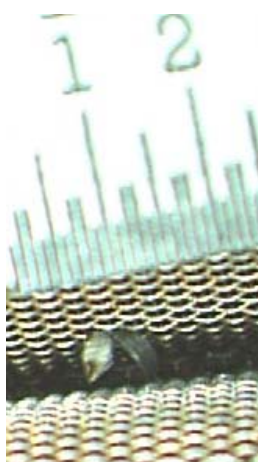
Steel & Aluminum Shavings Found in Engine Fuel Filter
